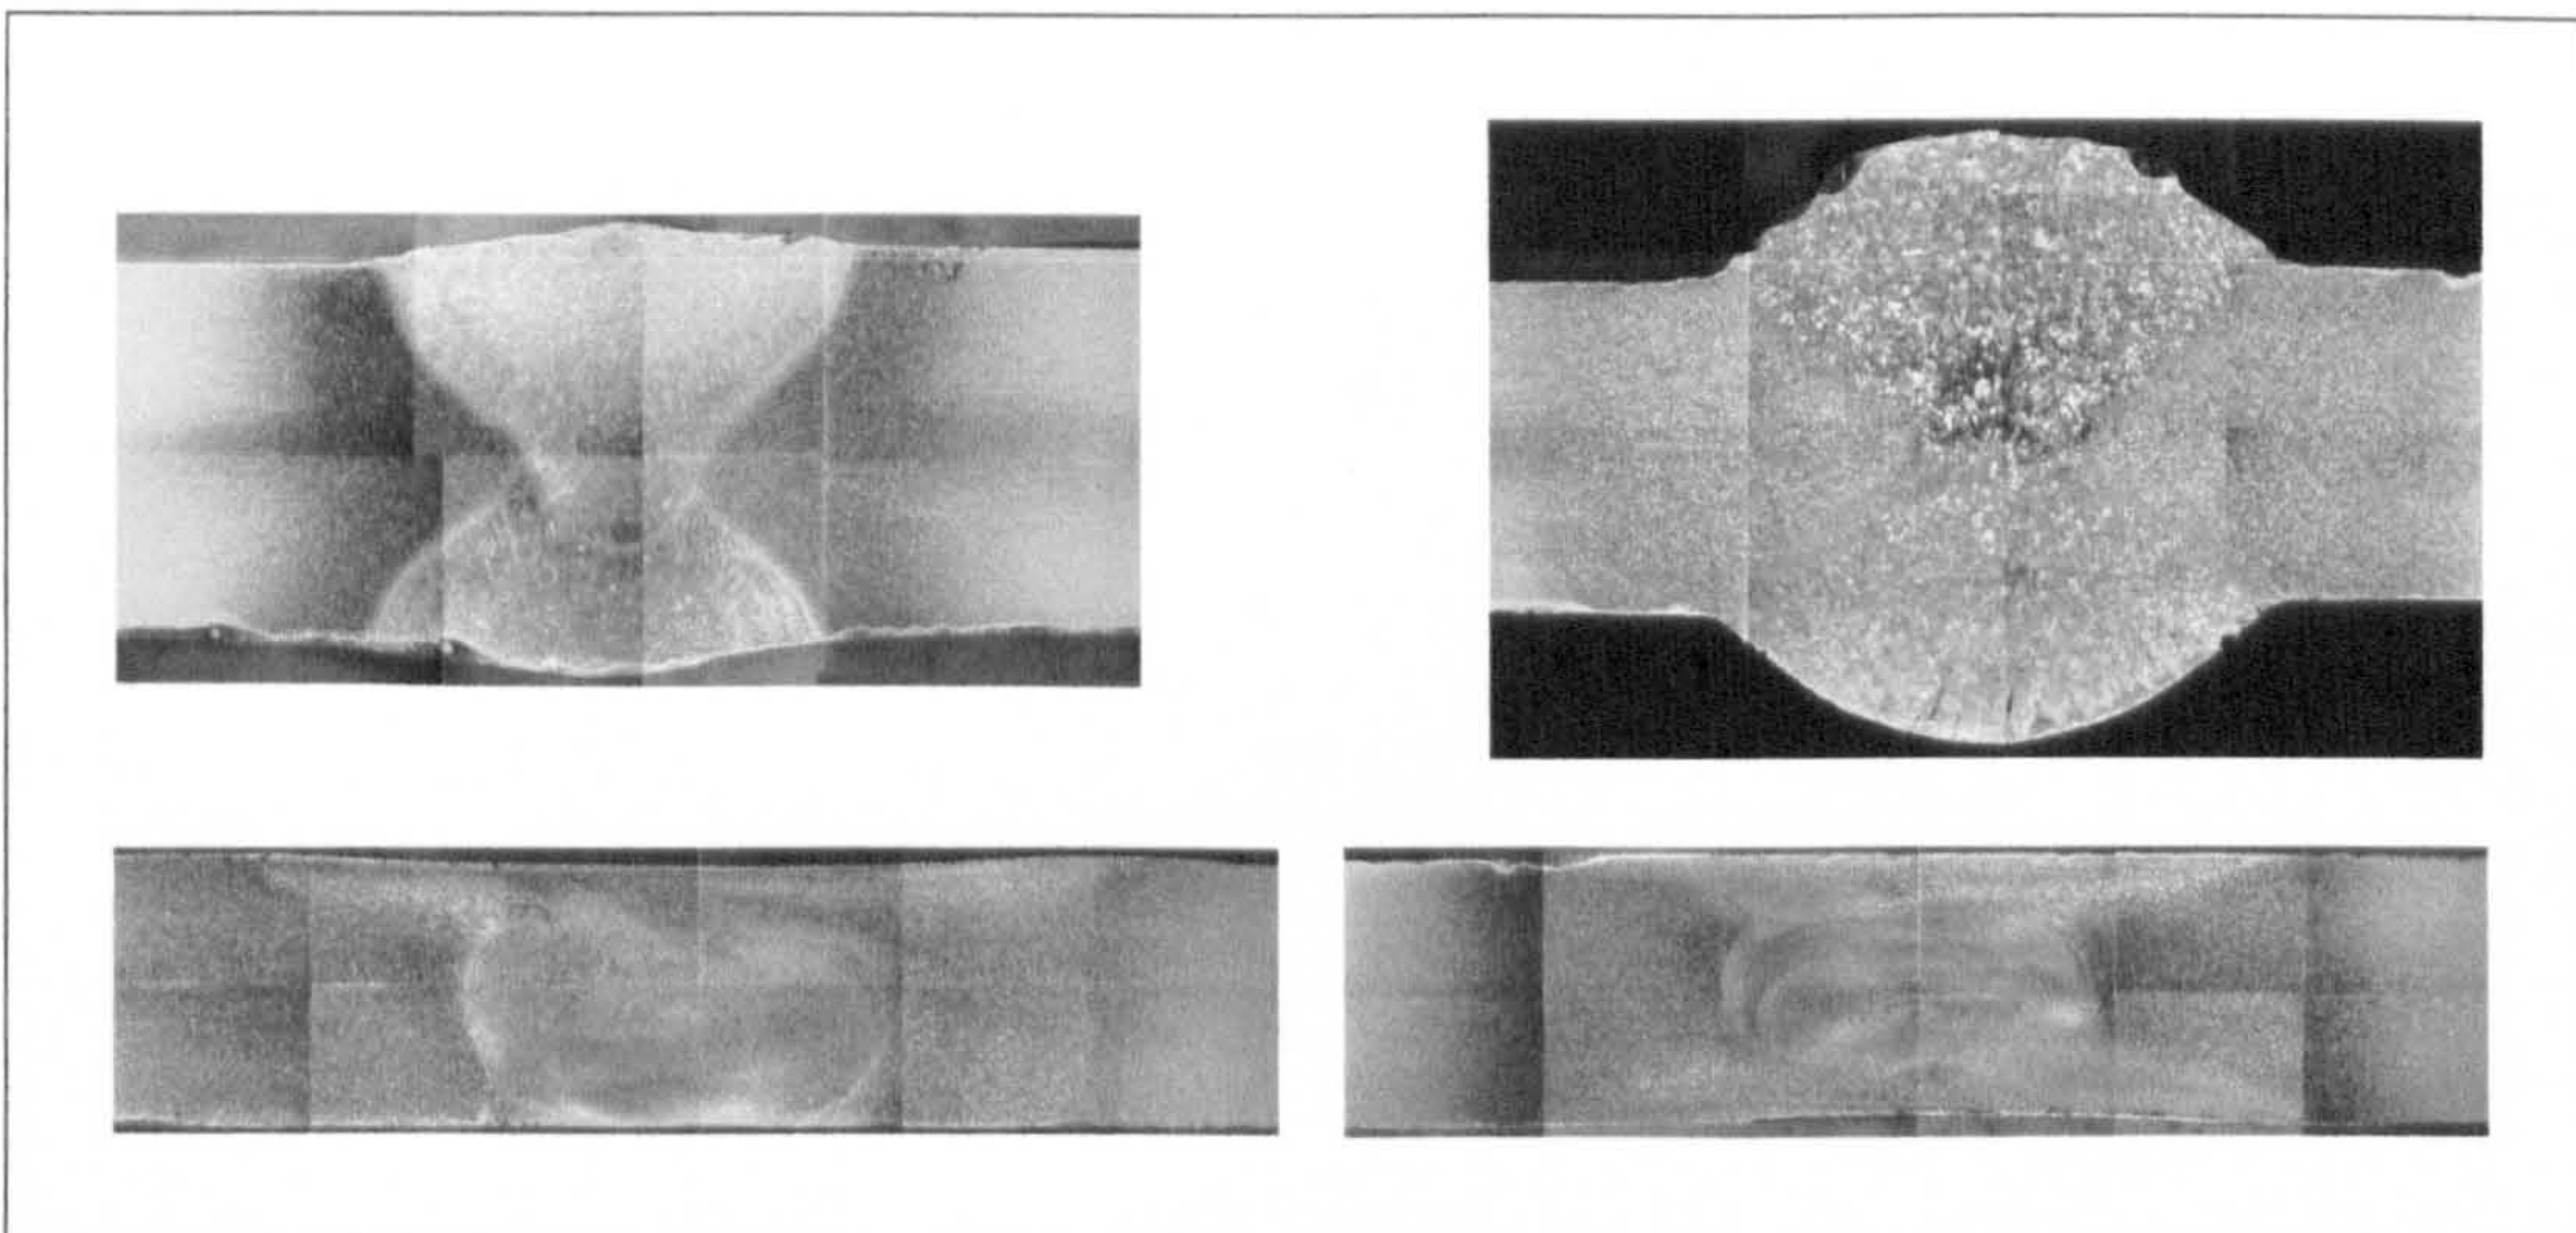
Cross sections of MIG LI (upper left), MIG HI (upper right), FS SP (lower left) and FS DP (lower right) (8 mm plate thickness for all welds).
